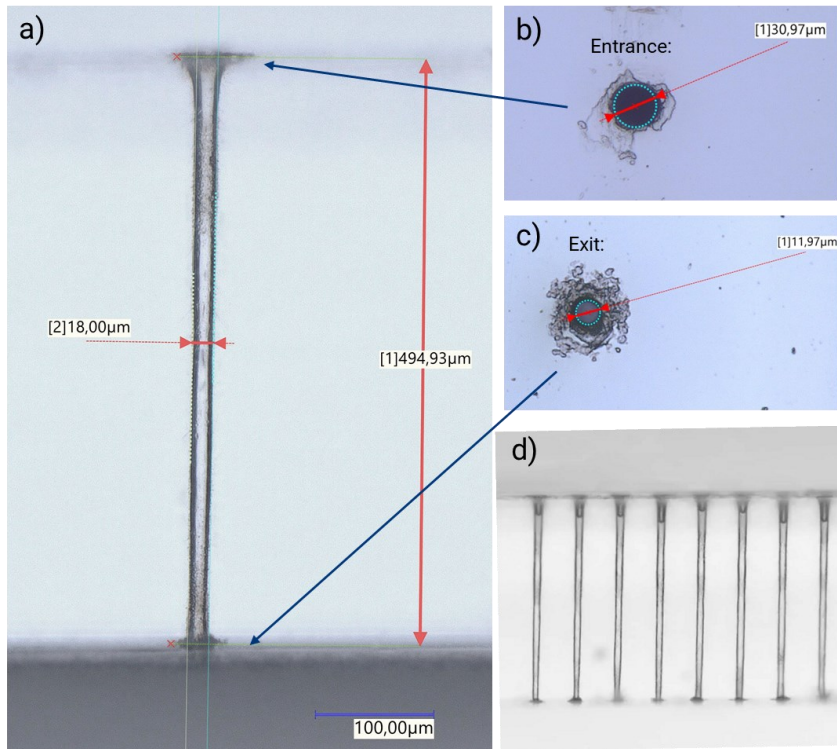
Side view of through hole drilled Eagle XG (a); its entrance (b) and exit (c); series of holes drilled with the same process parameters (d).
